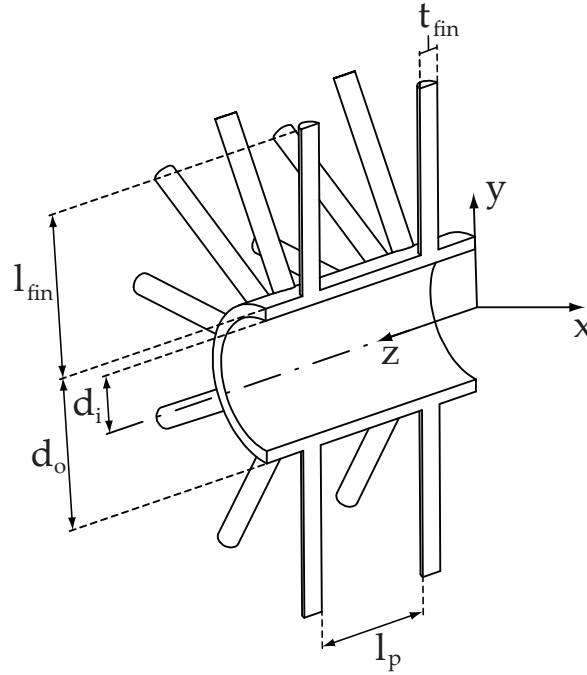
Section cut view of the Sunrod tube and corresponding nomenclature for pipe and fin dimensions.
